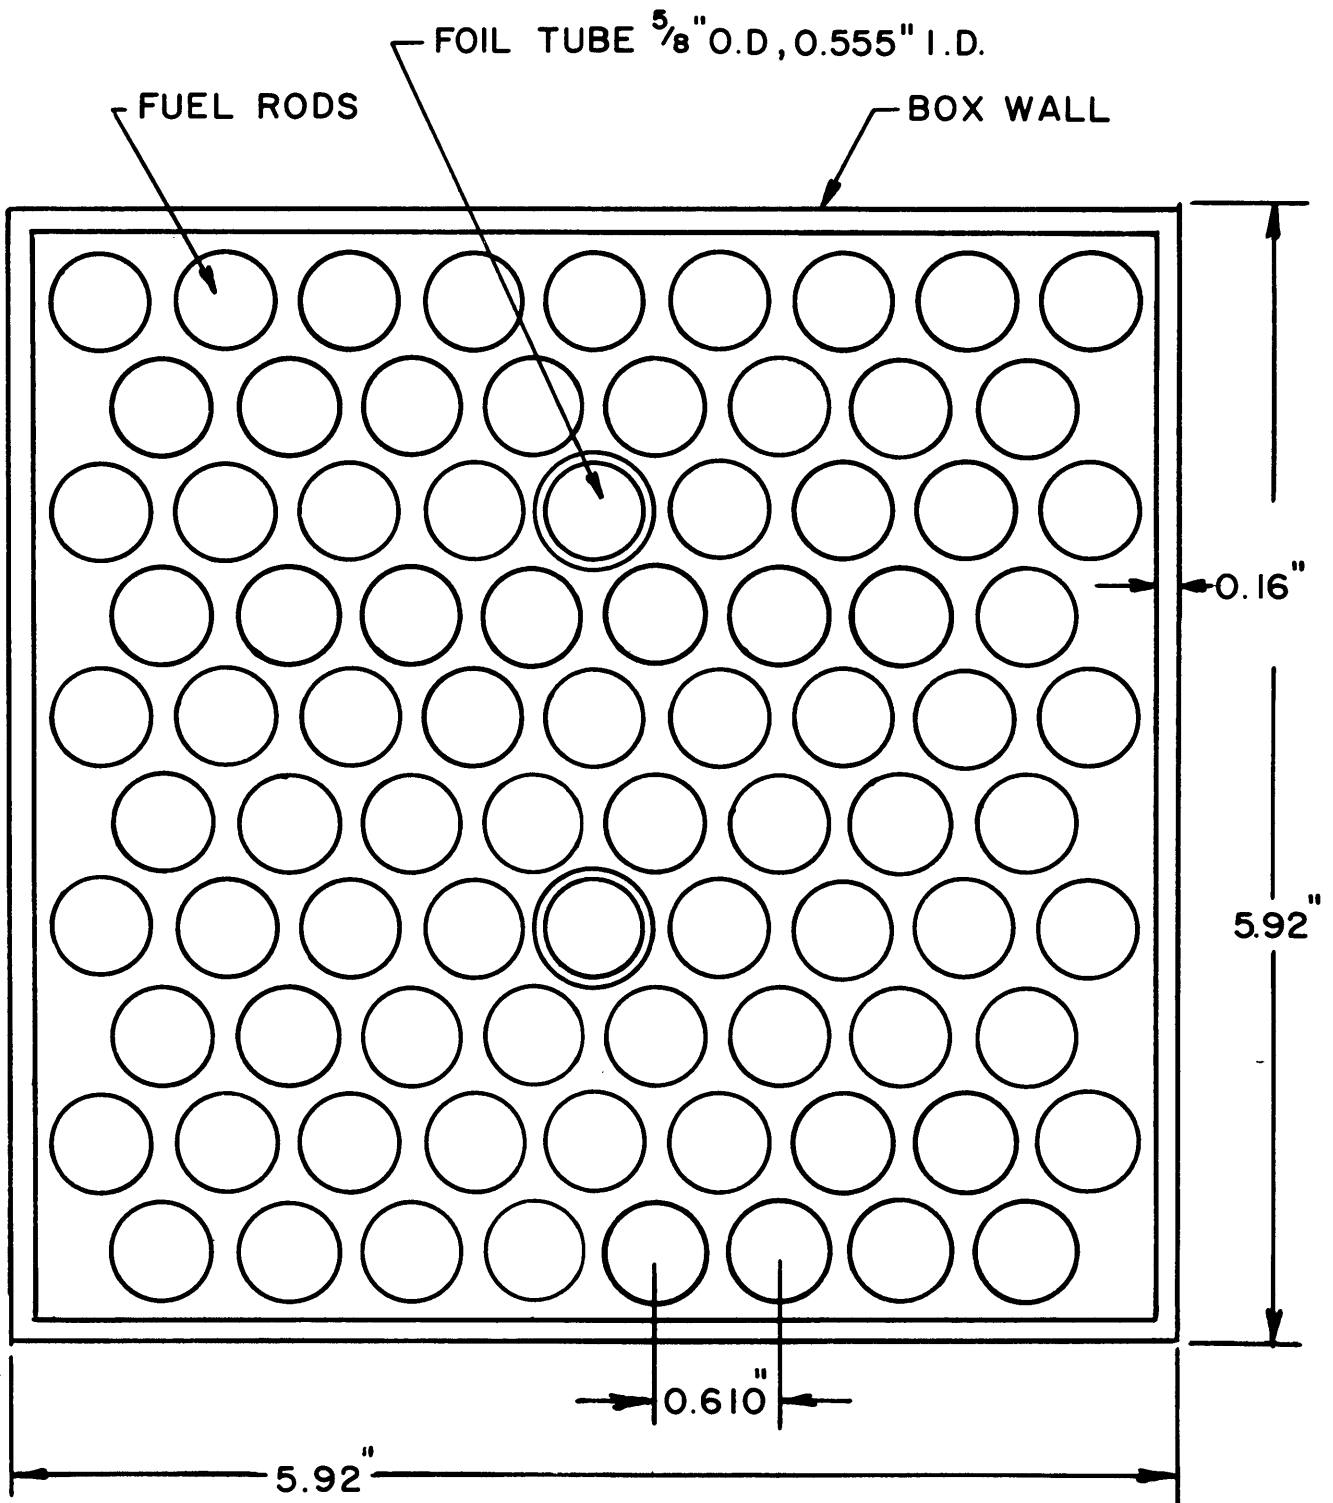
FUEL ARRANGEMENT IN SPECIAL SUBASSEMBLY
